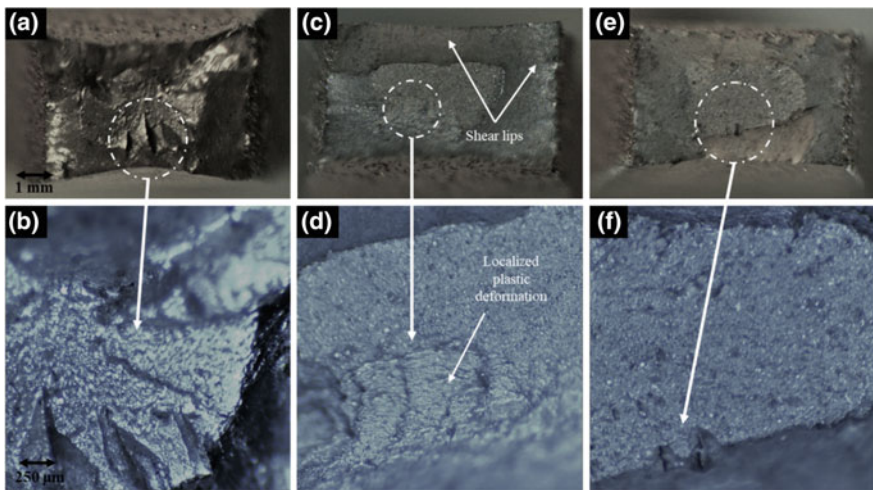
Overall and magnified views of the tensile fracture surface of heat-treated specimens a, b specimen 1, c, d specimen 2, and e, f specimen 3
